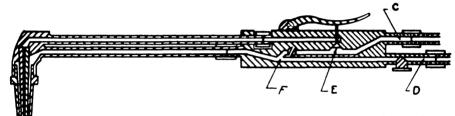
Cutting torch section: A. Cutting oxygen orifice, B. Preheating flame orifices, C. Oxygen inlet, D. Acetylene inlet, E. Cutting oxygen valve, F. Mixing chamber
